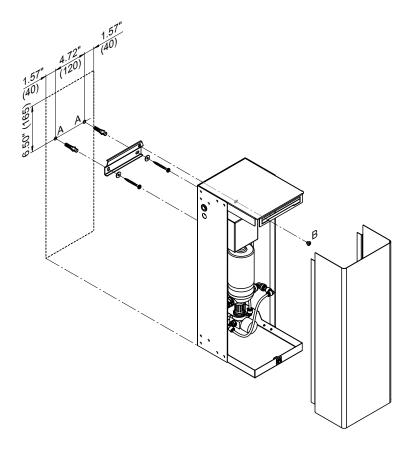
Mounting the booster module (dimensions in inch (mm))
